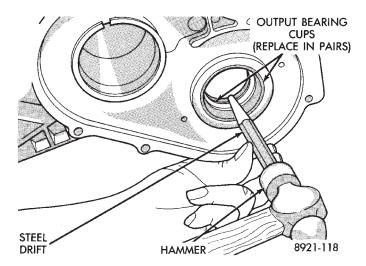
Remove Output Bearing Inner Cup CAUTION: Drift bearing cup all the way around.
